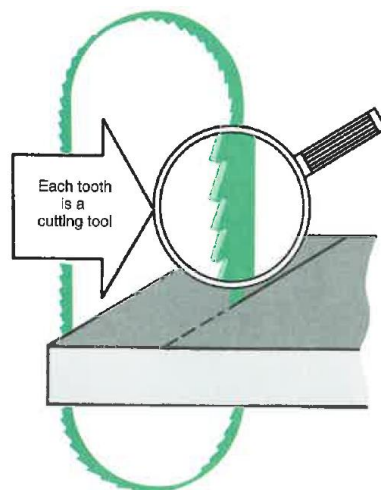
Band machining makes use of a continuous saw blade, with each tooth functioning as a precision cutting tool.
